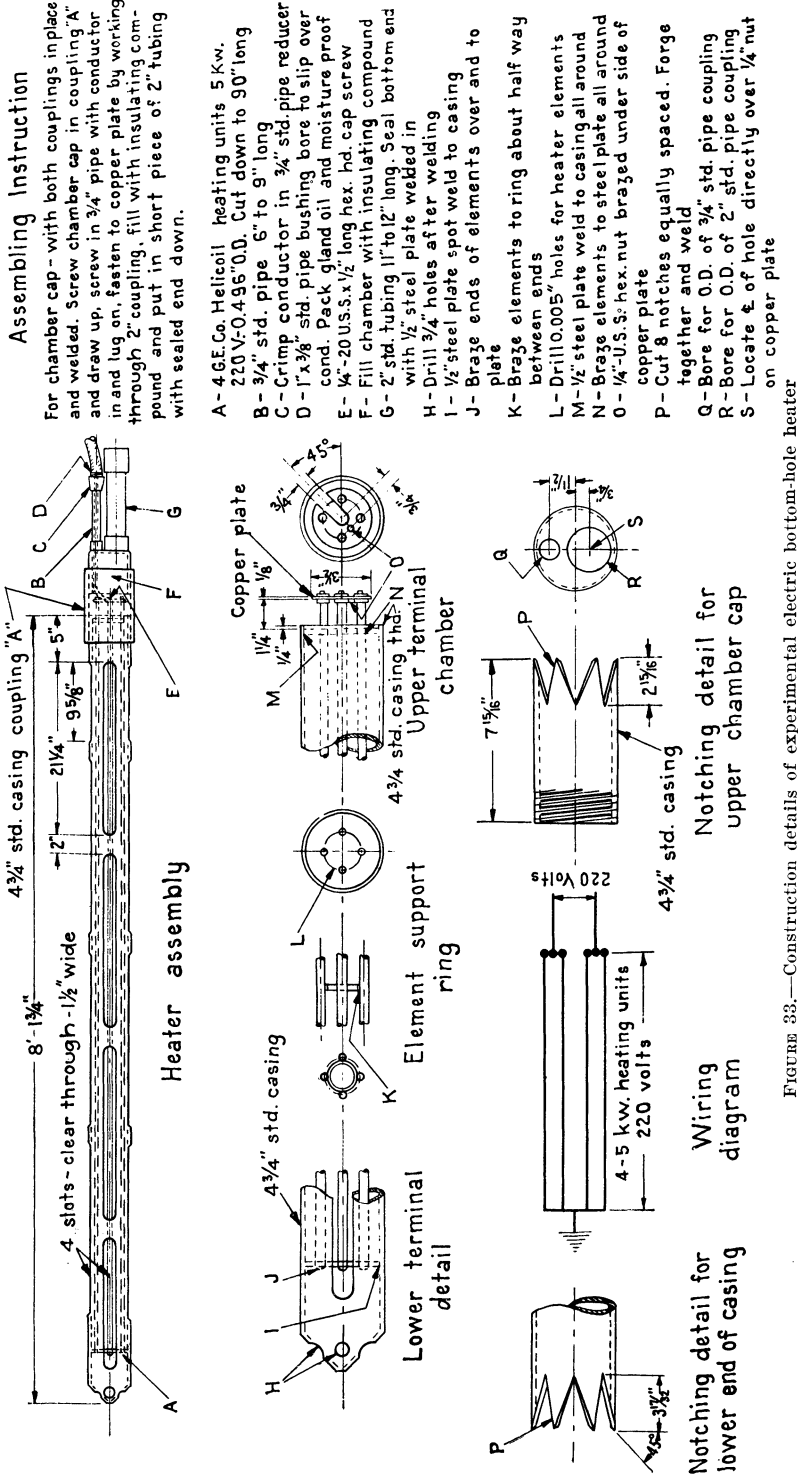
Construction details of experimental electric bottom-hole heater
